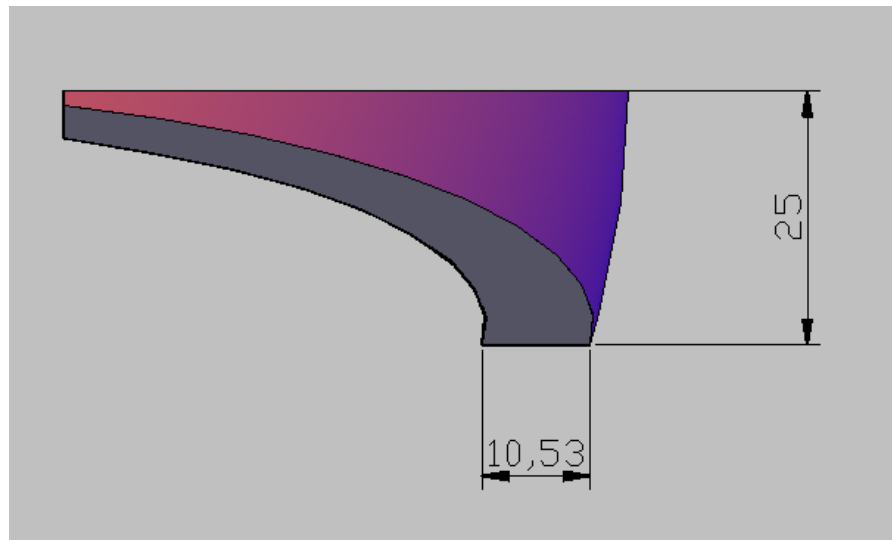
Front view dimensions of the triangle shape bottom part of the safety helmet
